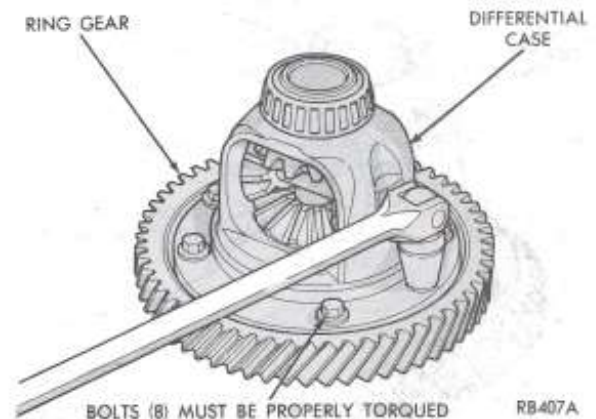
Remove or Install Differential Ring Gear Bolts and Ring Gear
